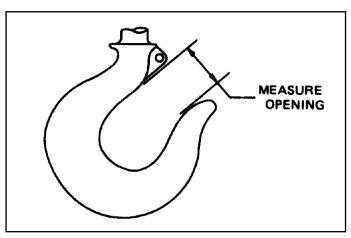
Lower Hook Opening (Shown with latch removed for clarity.)
